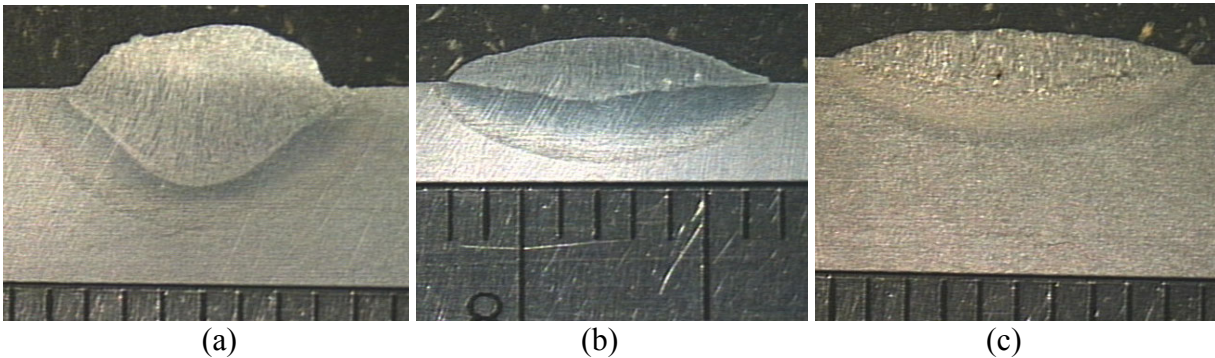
macrographs of welds made at (a) 0.5, (b) 50, and (c) 100 m water depth. The scales shown are in millimeters
